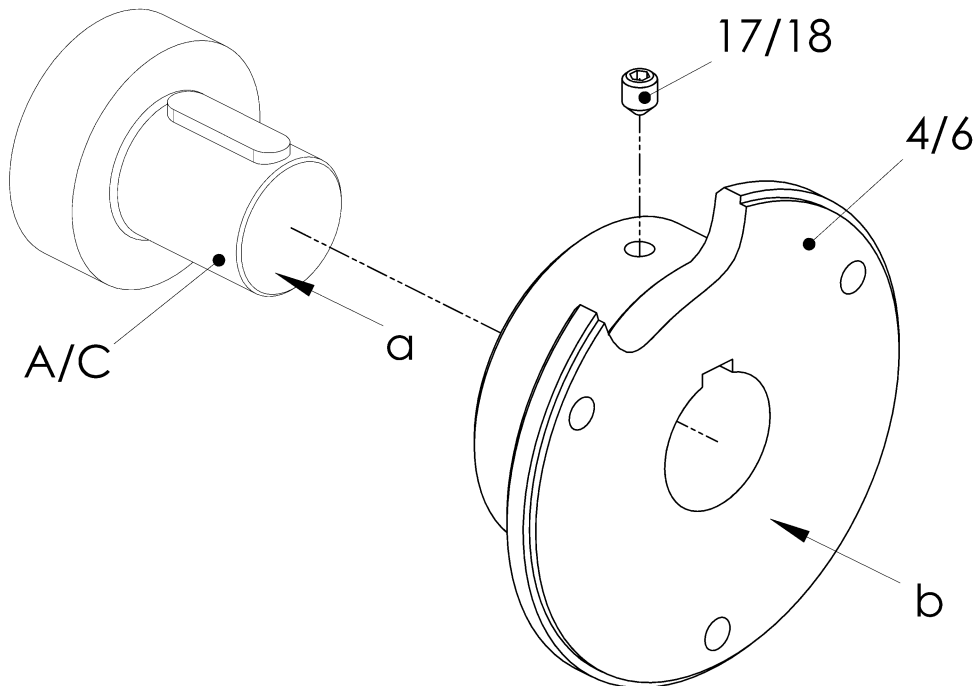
Mounting the hub with cylindrical bore and keyway
